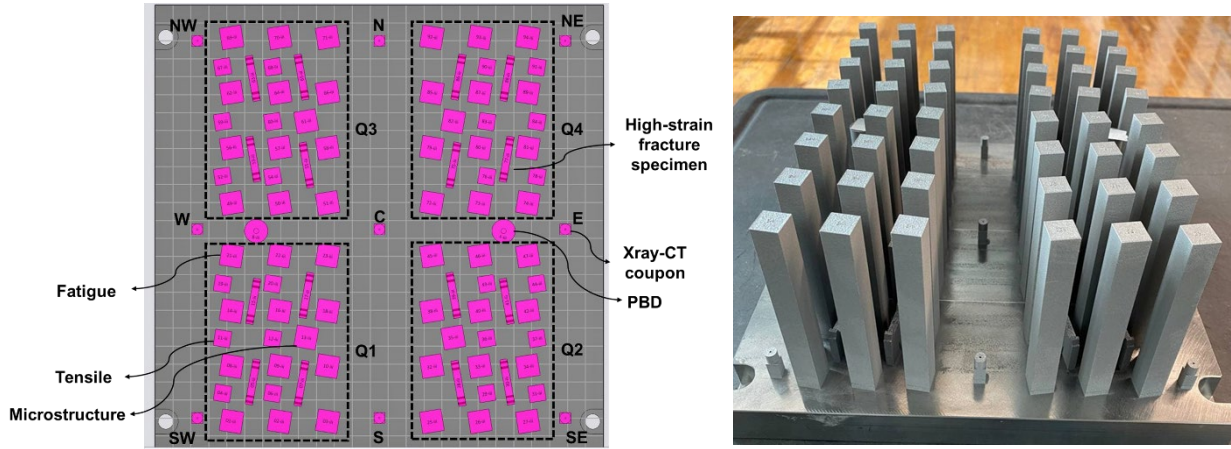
(a) The top view of the build layout used for fabrication, and (b) parts on the build plate after fabrication.
